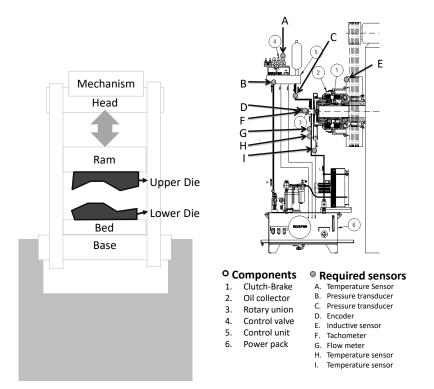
Press Machine composition: Left) Main components. Right) Specific layout example
